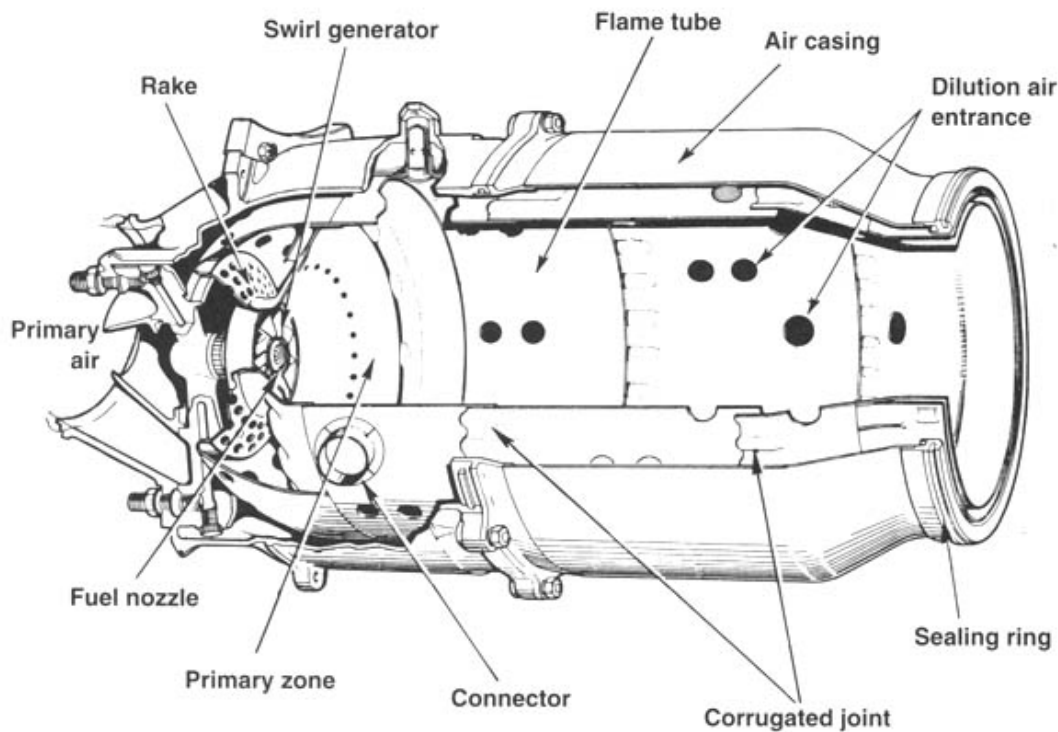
The Combustion Chamber: Typical Burner Assembly.
